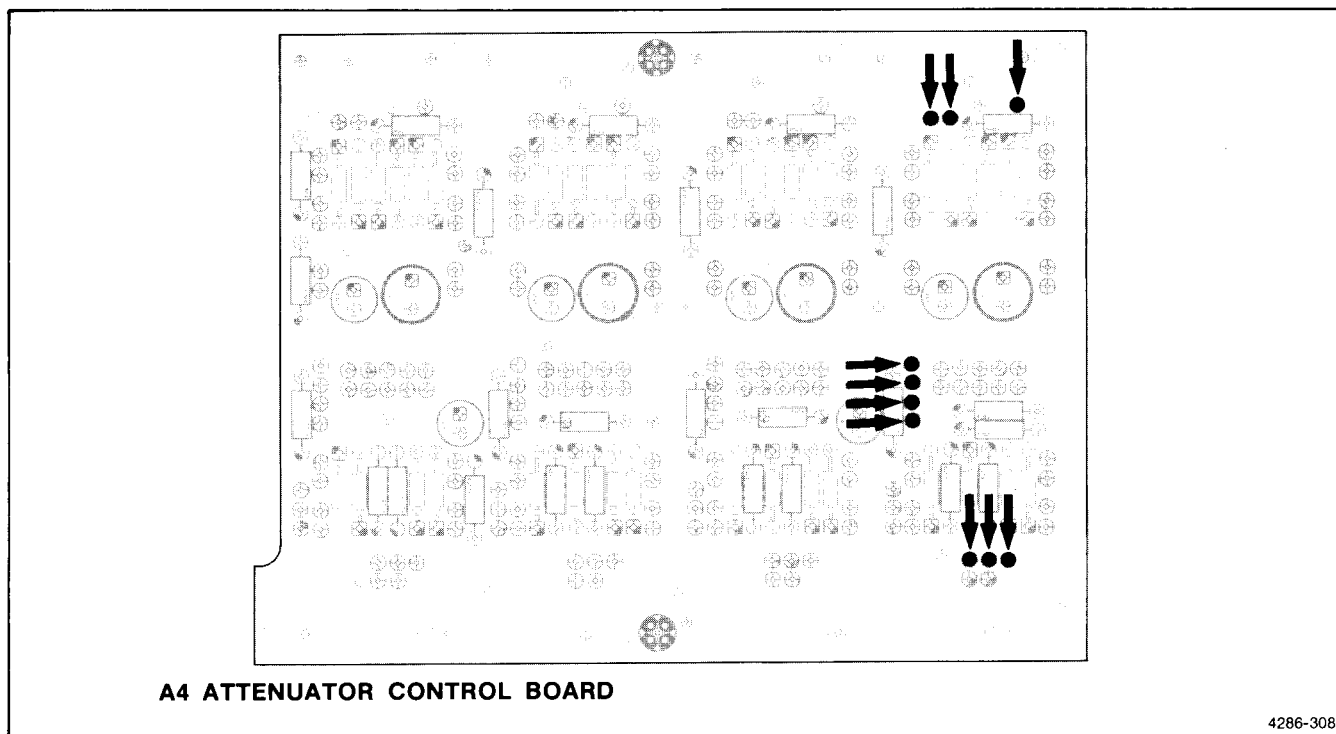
The 10 pins that must be unsoldered to remove an attenuator module.
